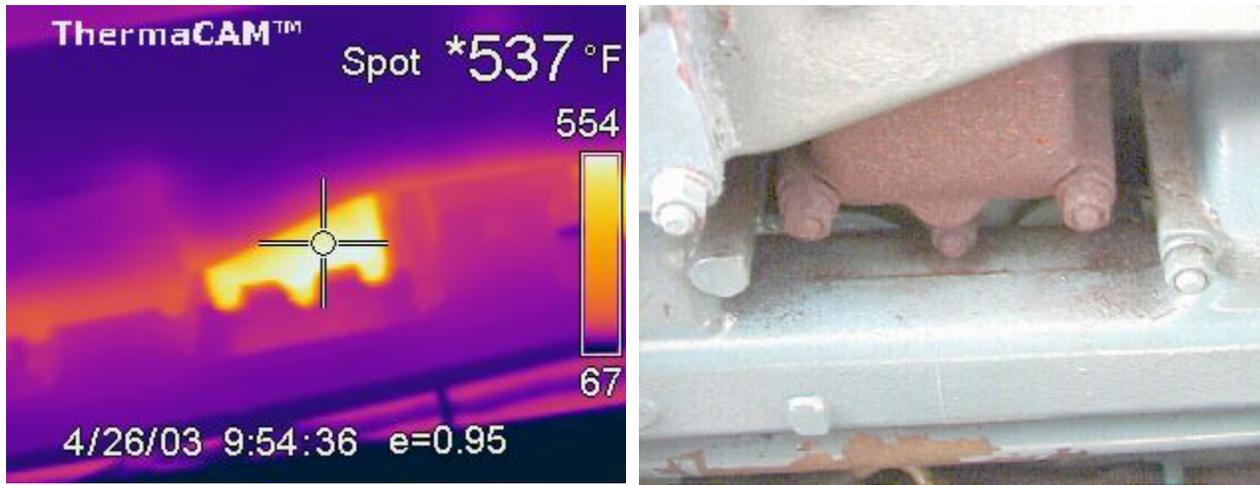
Views of a portion of an exhaust manifold for a 160 hp 6 cylinder turbocharged diesel engine. During the sea trial, the engine overheated. A thermal image of one of the exhaust ports on the manifold showed excessive temperature. Buyer advised to have a marine mechanic examine the turbocharger system.
